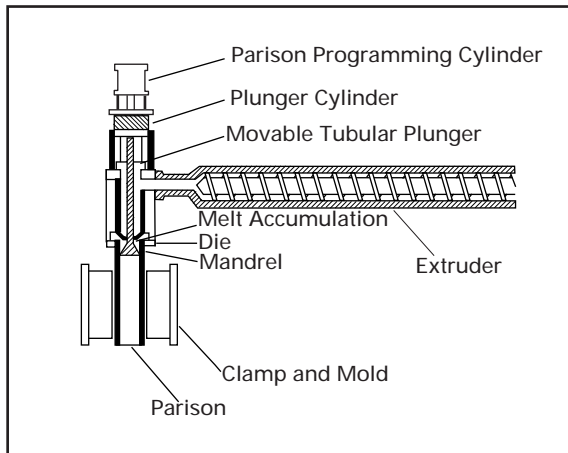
Intermittent Extrusion Blow Molding Reciprocating Screw System
